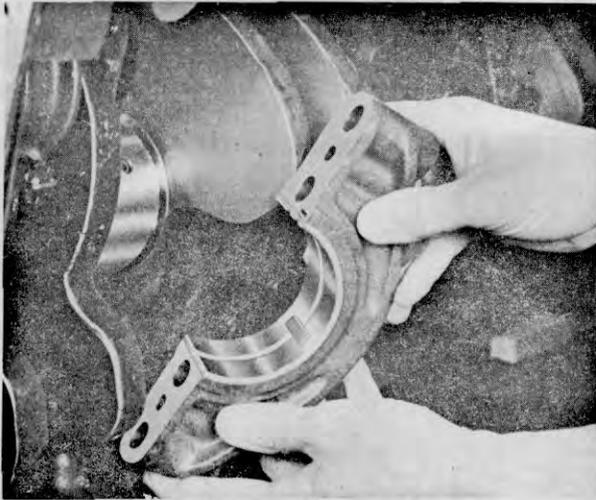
Checking Bearing Clearance with Plastigauge
